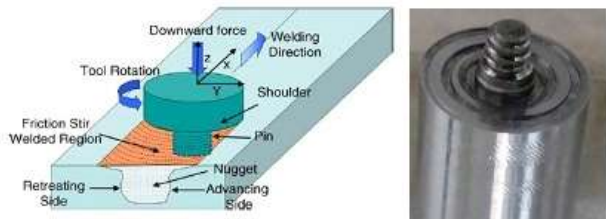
Schematic Sketch of Friction Stir welding showing the Various Characteristic Regions and tool
